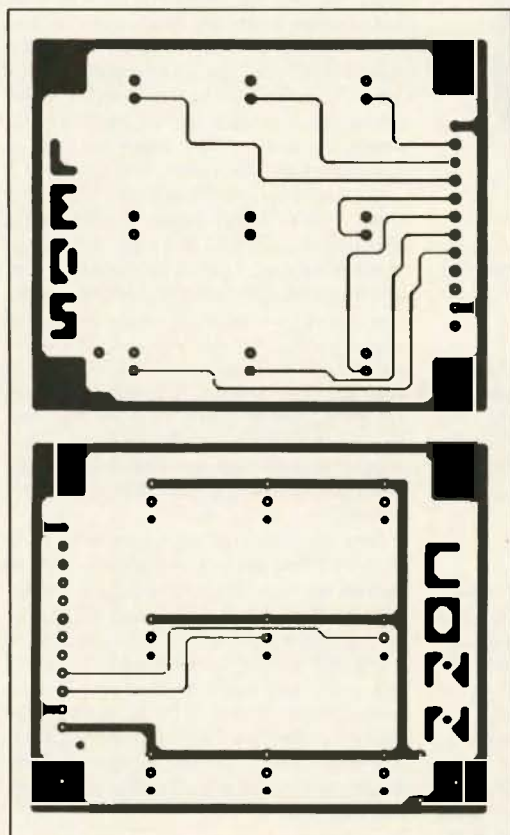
a) Top foil layout for the LED board. b) Bottom foil layout for the LED board.
